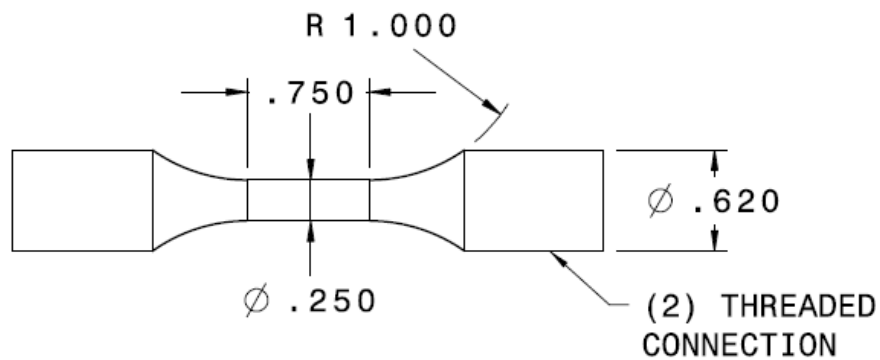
Drawing of round fatigue specimen used for S/N curve development (Dimensioned in inches)
